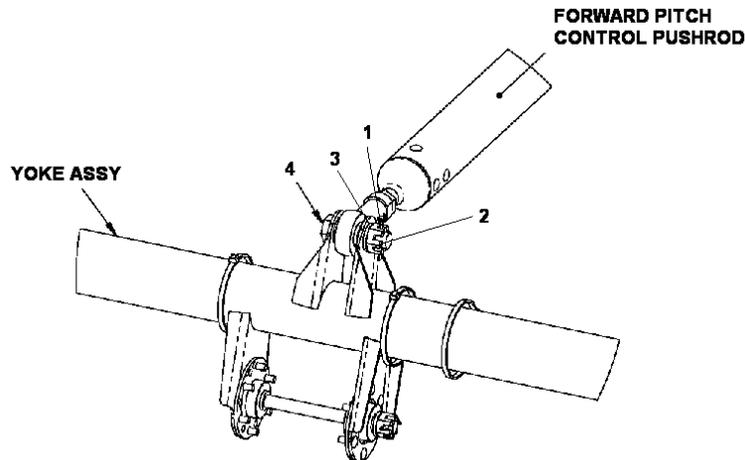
Forward Pitch Control Pushrod to Yoke Assembly
